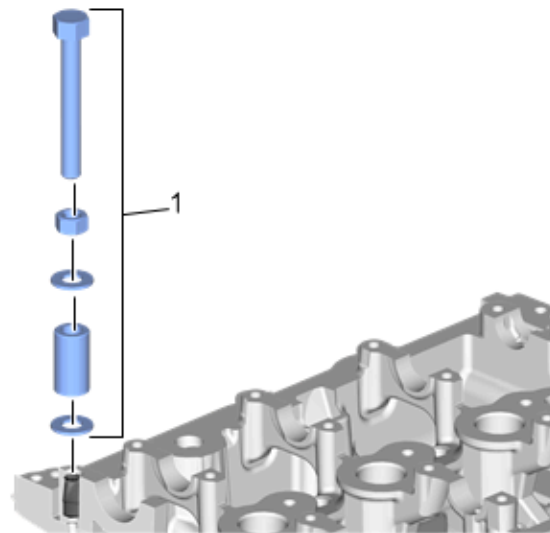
Special Tool To Remove Oil Manifold Check Valve Sleeve From Cylinder Head
